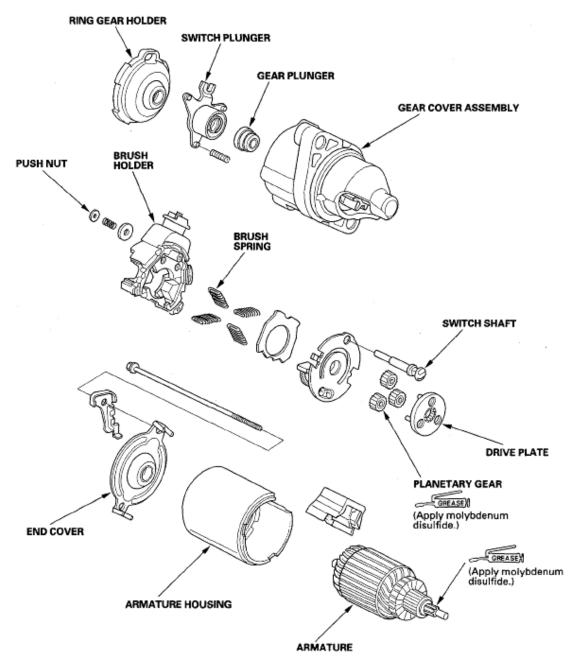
Exploded View Of Starter Overhaul Courtesy of AMERICAN HONDA MOTOR CO., INC.
